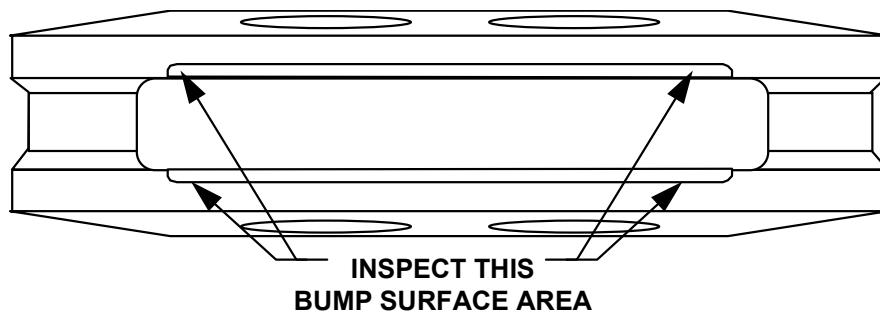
Crankshaft Counterweight Bump Surface Inspection
